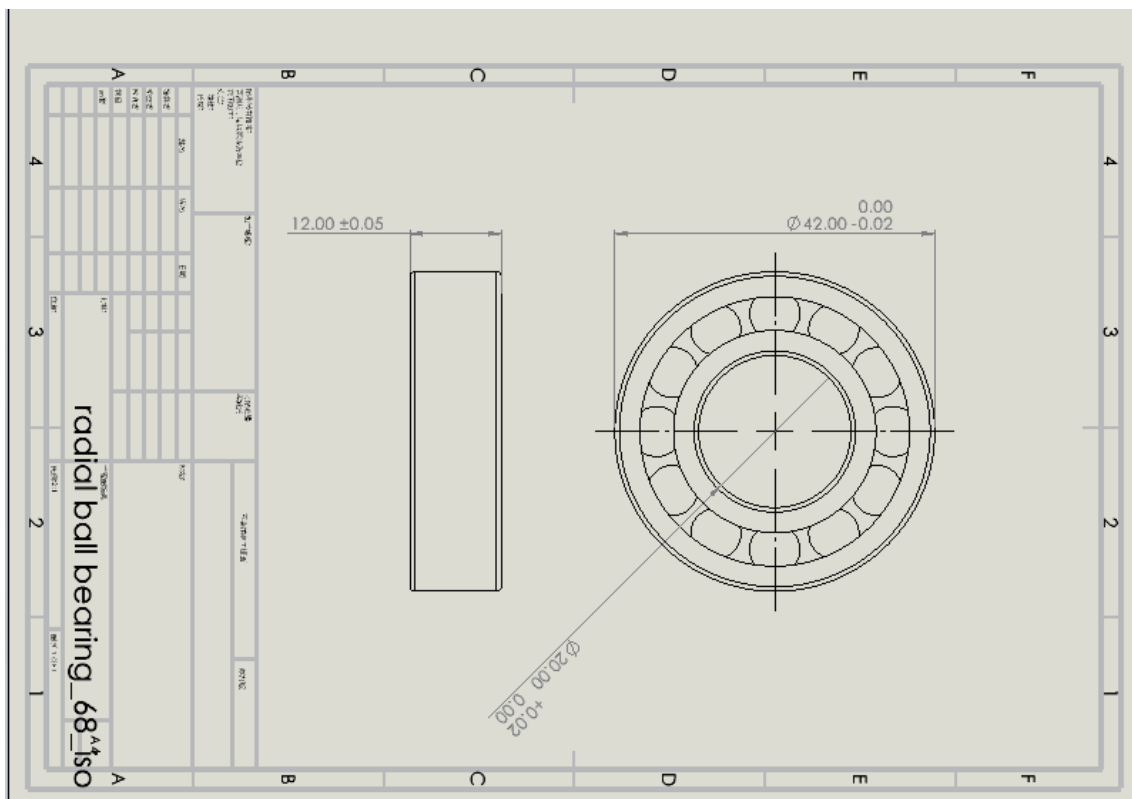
(Color online) Diagram for bearing dimensions of the investigated molten aluminum alloy casting mechanism.
